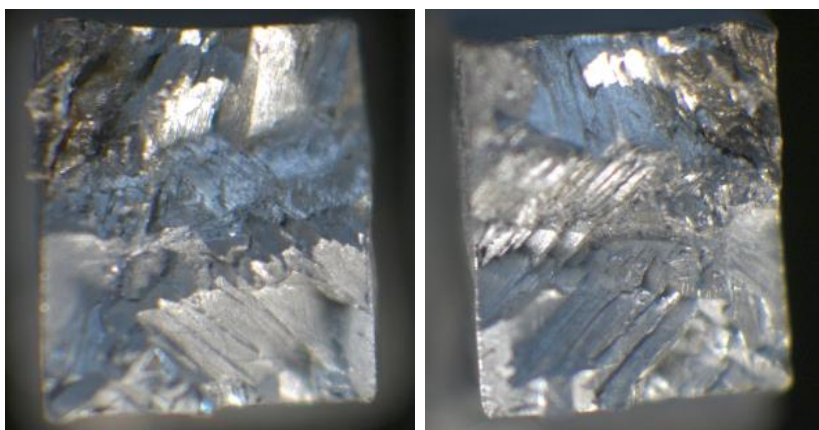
Fracture surface of a commercial pure Mg tensile test bar produced under a cover gas of 0.5%SF₆/CO₂. The symmetrical brown regions were double oxide film defects. The dimensions of the fracture surface are 5 mm × 6 mm.
